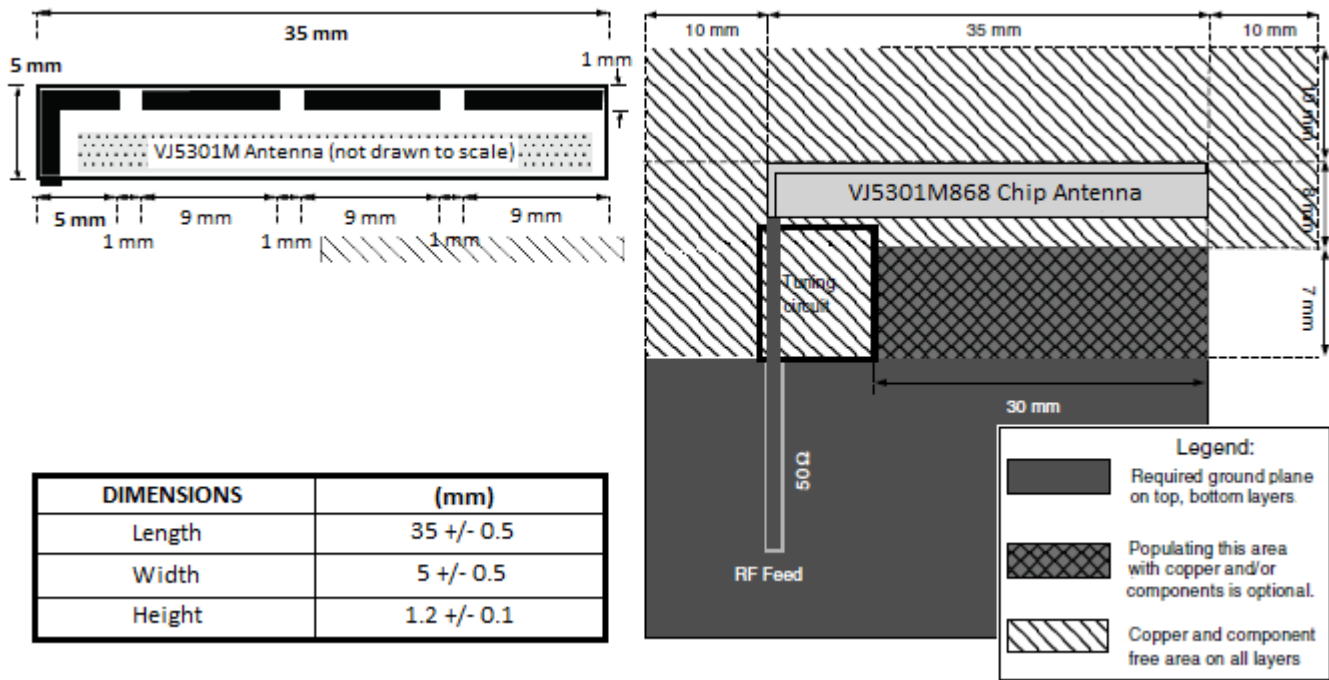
of VJ5301M868 footprint, chip antenna mechanical dimensions, and PCB layout dimensions
